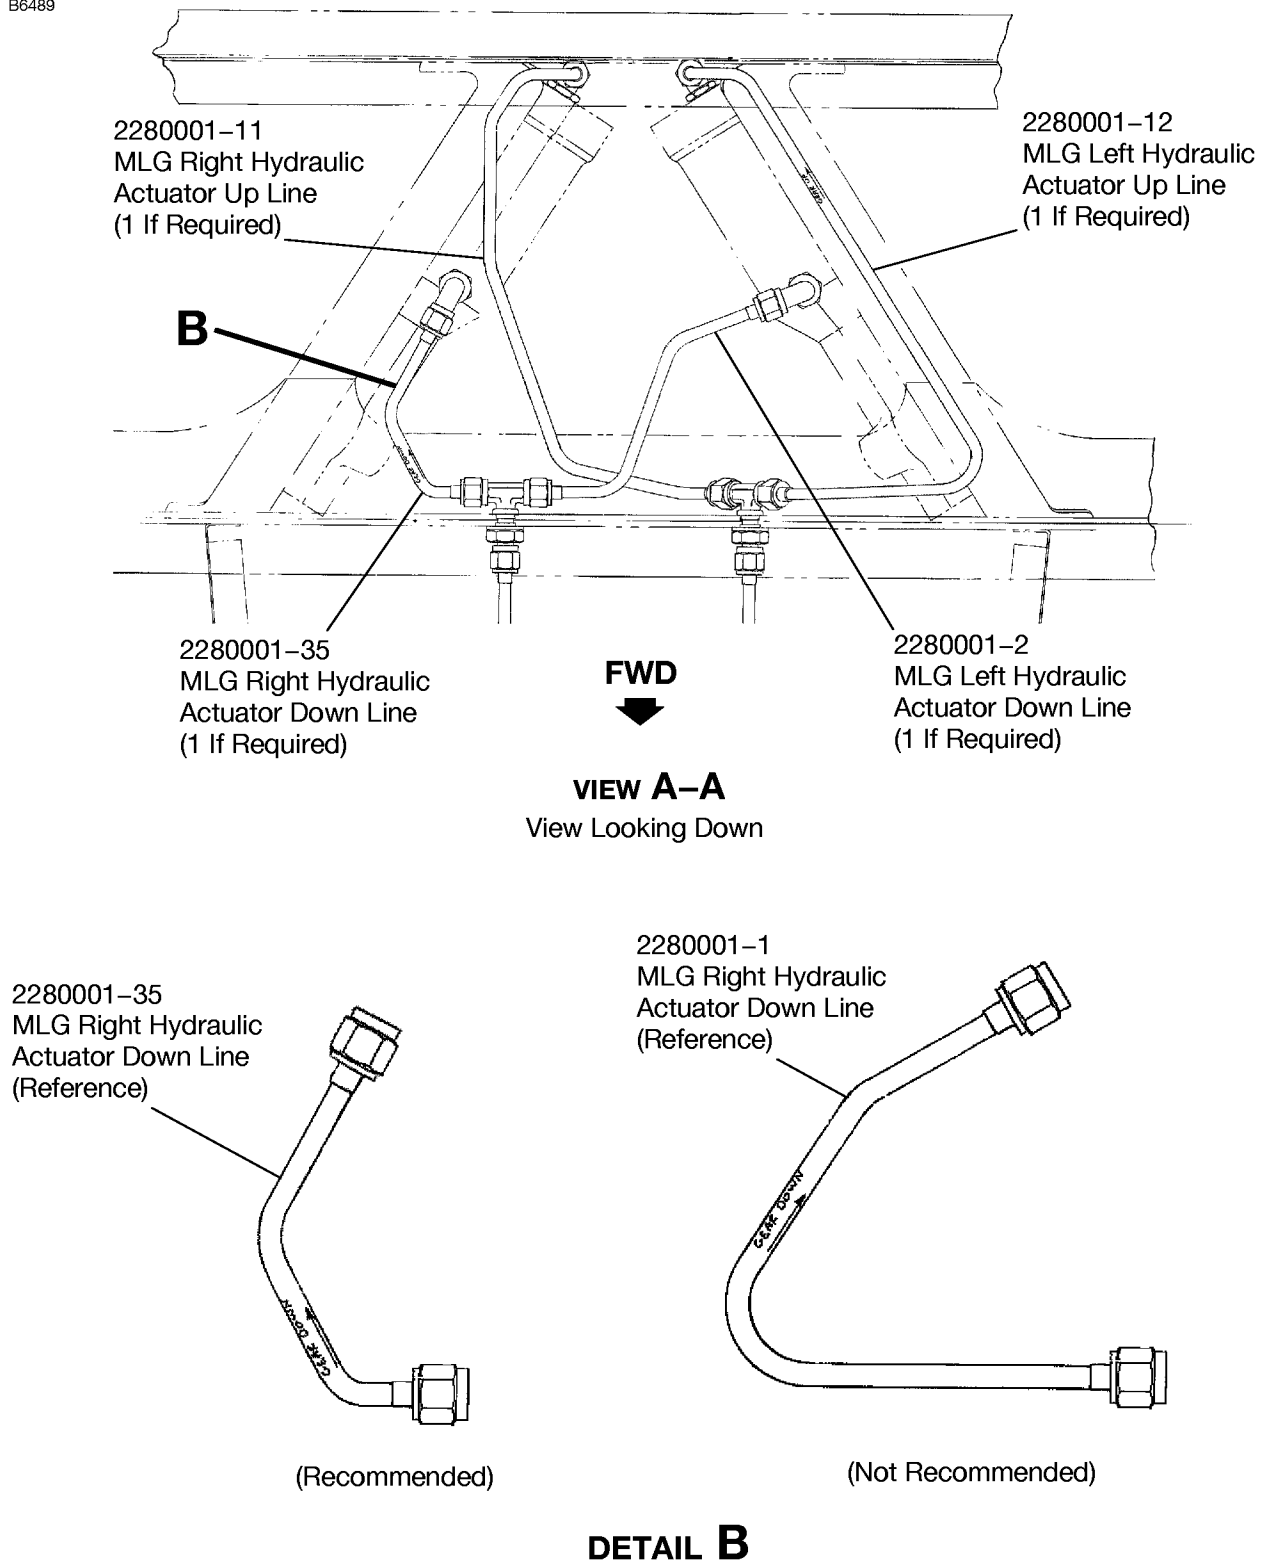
MLG Actuator Hydraulic Lines Inspection (Sheet 2)
